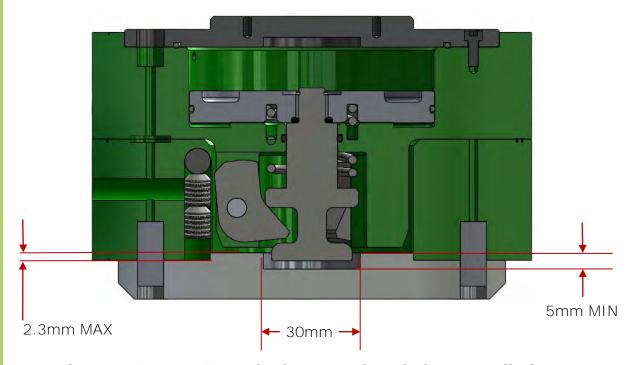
ET100 Tool Adaptor and Tool Plate Installation
